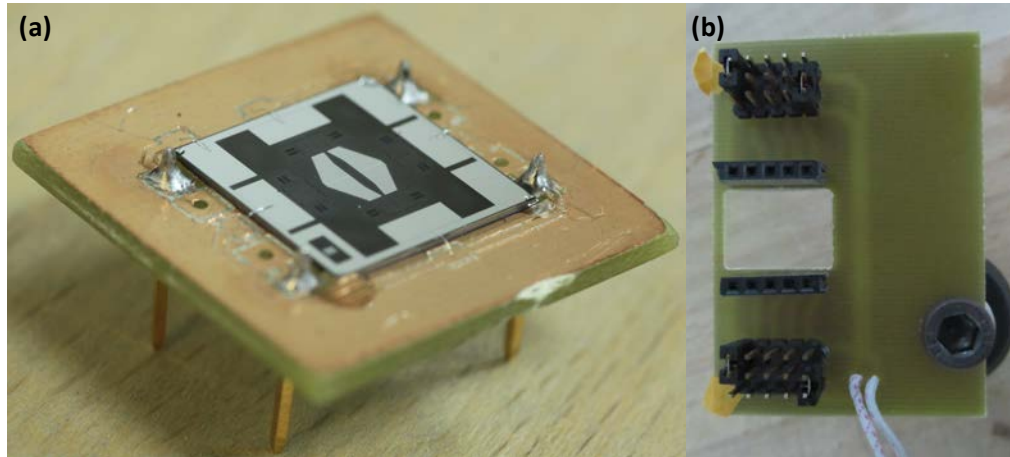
(a) MEMS device mounted on specifically designed PCB. (b) PCB designed for MEMS testing.
